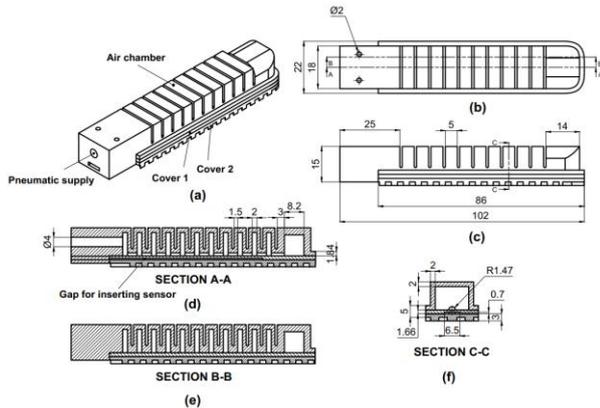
Design and dimensions of the soft finger: (a) an isometric view, (b) a top view, (c) a side view, (d) a section A-A, (e) a section B-B, and (f) a section C-C.
